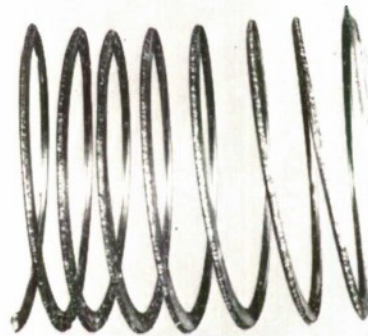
Thread failure in nut of 6 ft. diameter gate valve.
